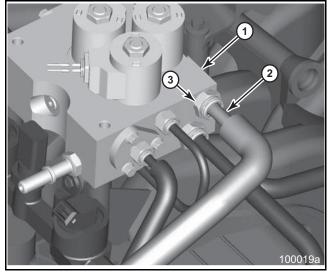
Forward Fuel Supply Line at FRPCM (Typical)
